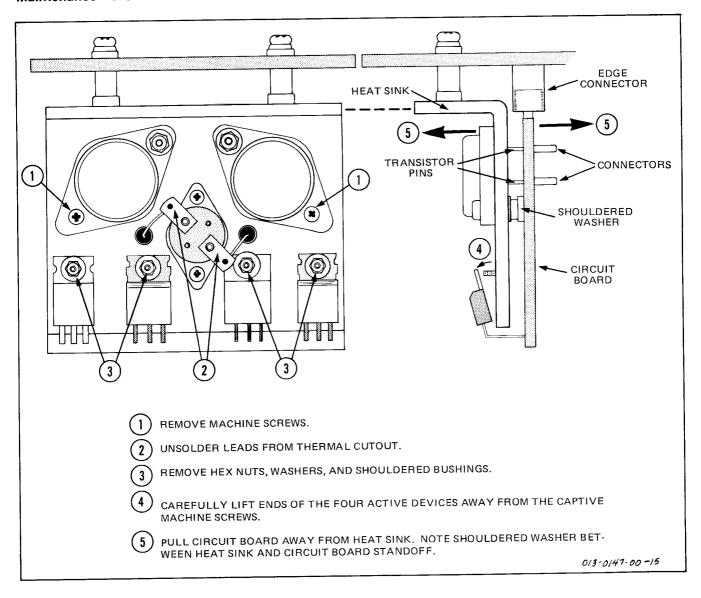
Input Regulator Supply card heat-sink removal.
